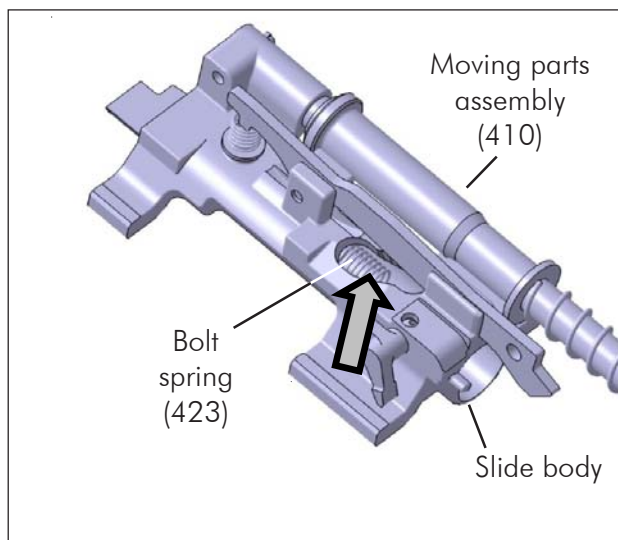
h - Bolt spring (423) inside the bolt body
